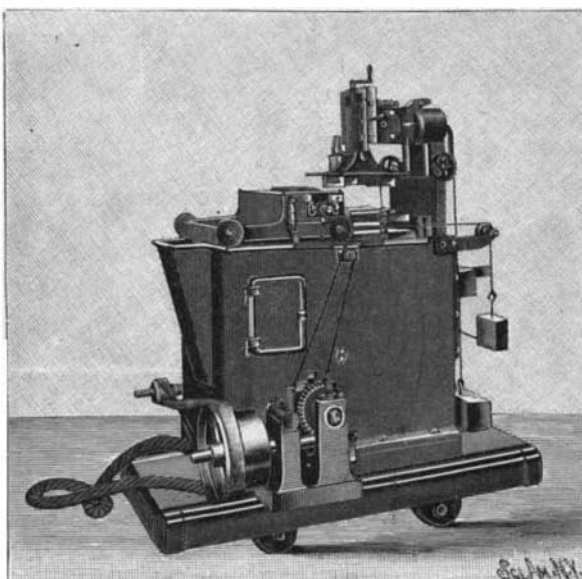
AUTOMATIC MACHINE FOR CLEANING THE PLATE.
